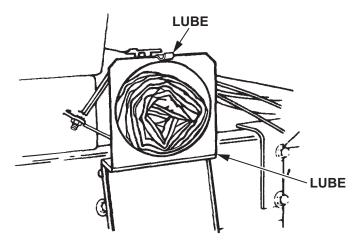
Tarpaulin Container Access Door Latch and Hinge.
